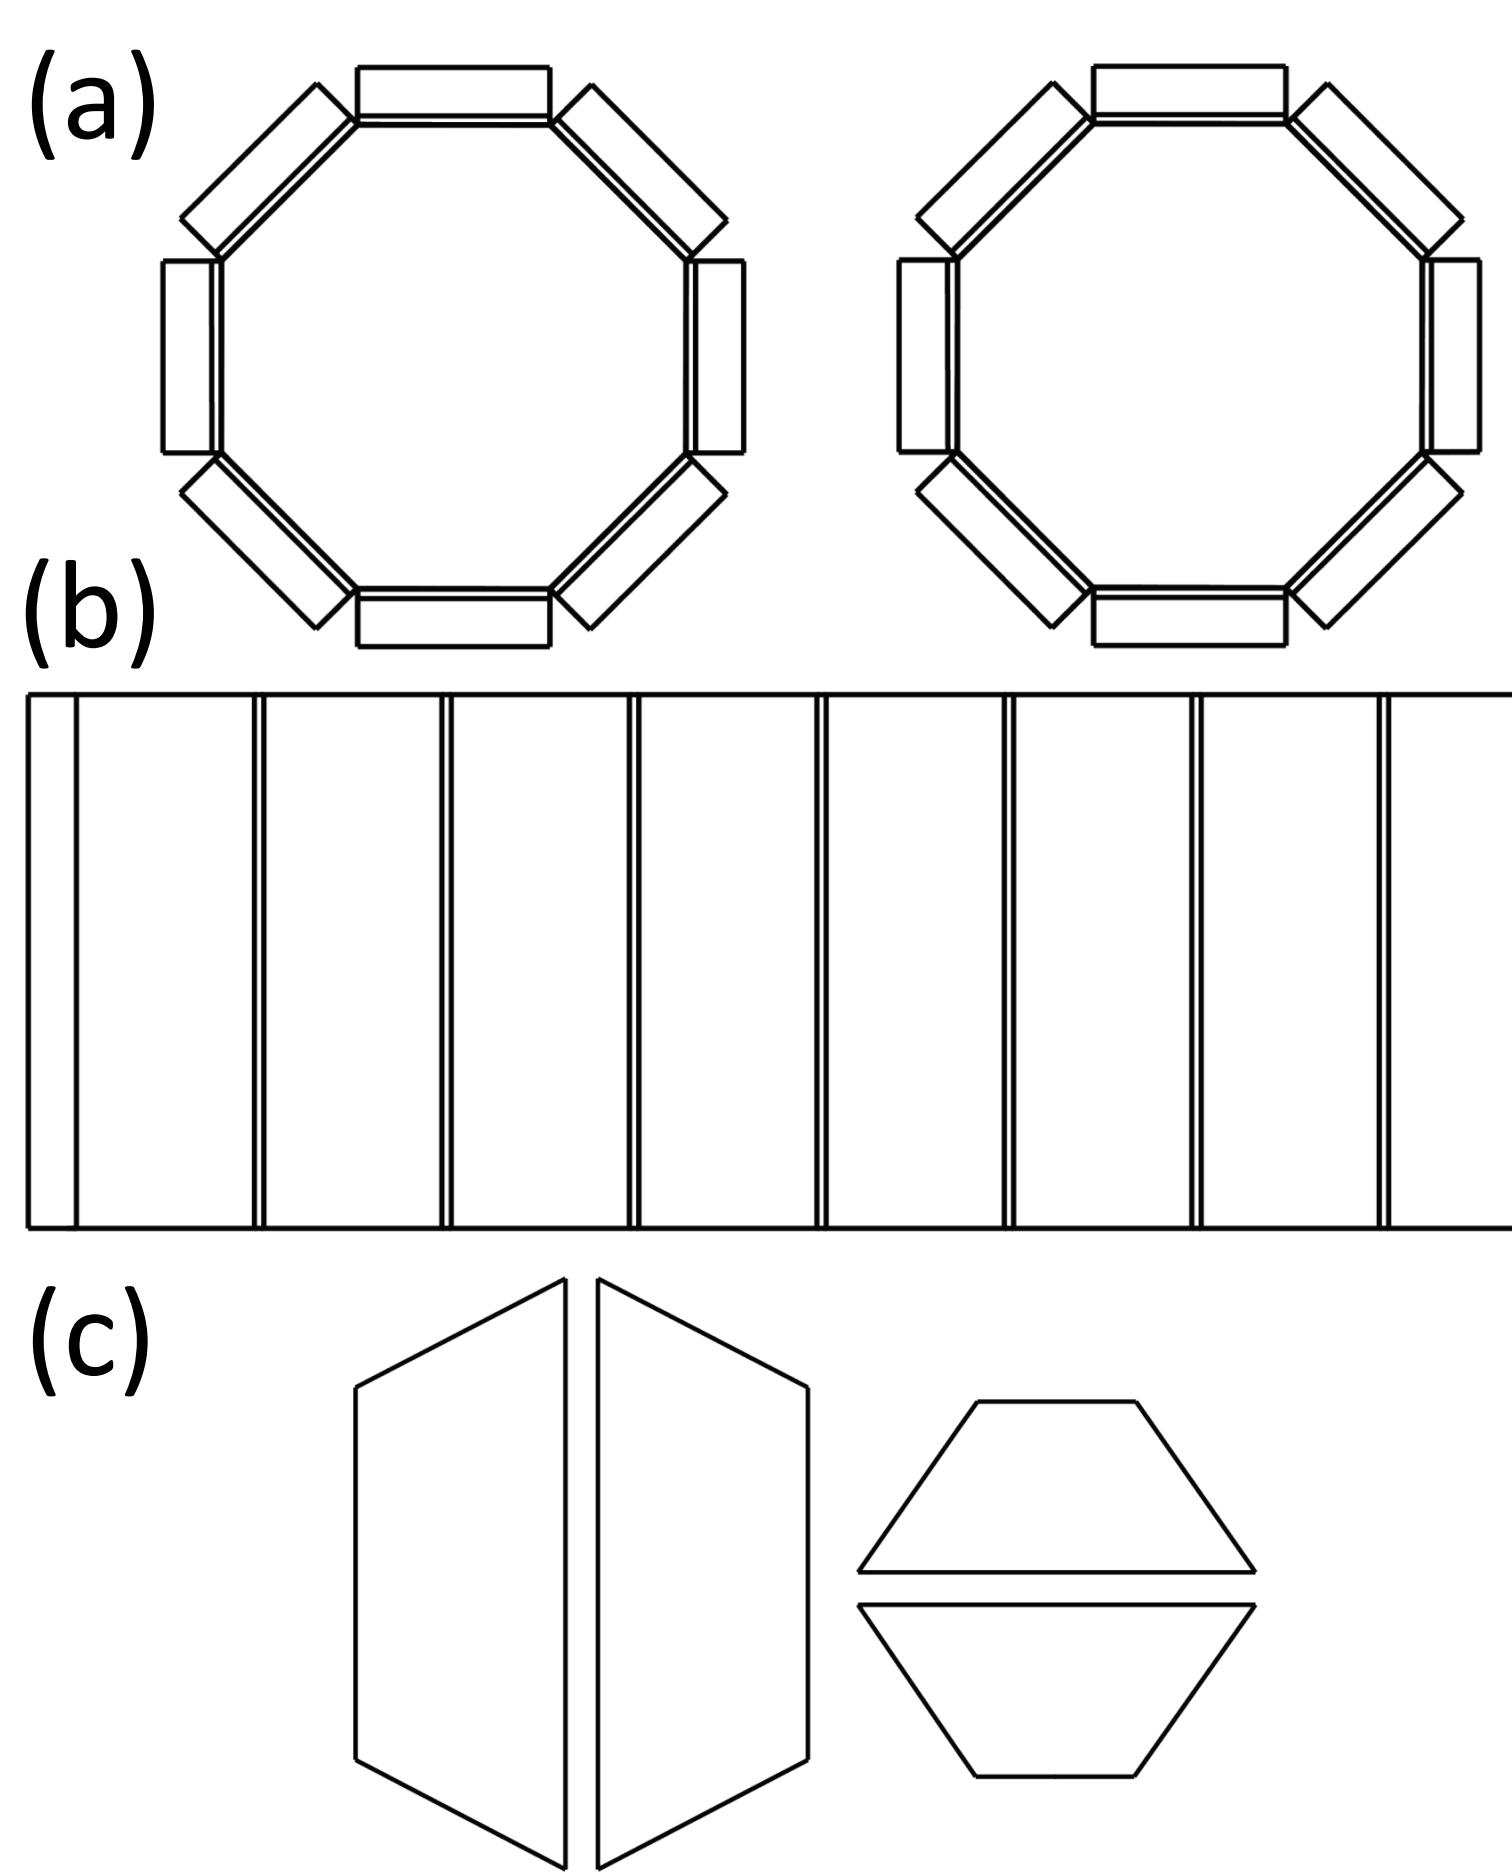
Technical drawing of the construction for the octagonal design of the payload. Three parts are required. Additional the new payload design technical drawing.
